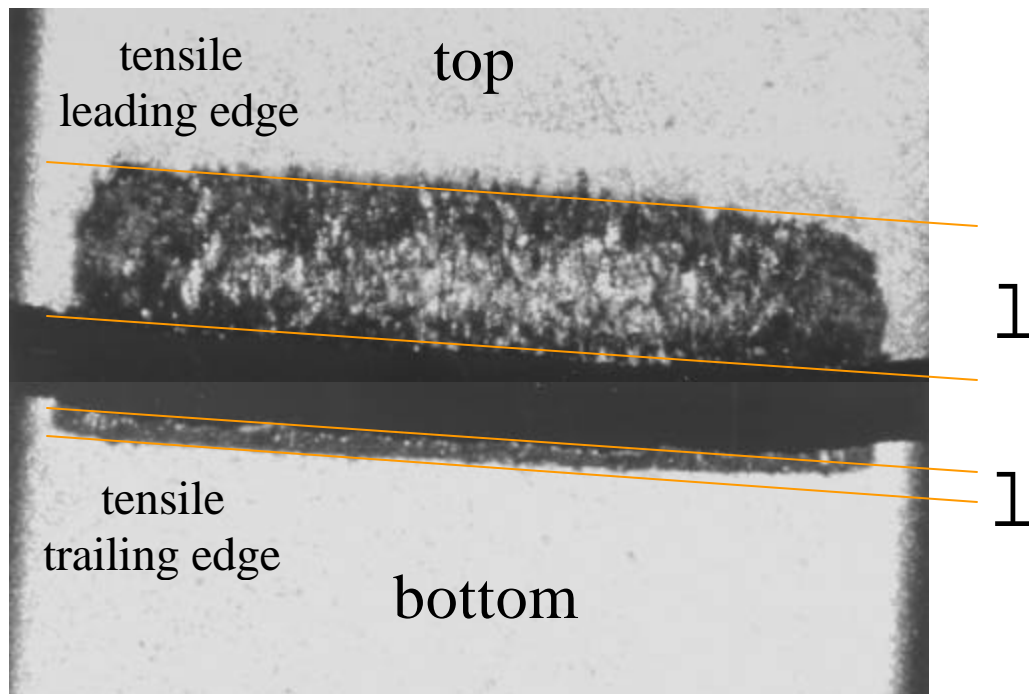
D.4. Optical photograph of the fretting/fatigue scar showing fracture to be in close proximity to the tensile trailing edge of contact but not at the edge of contact.
